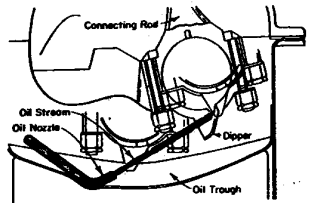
Connecting-rod bearing lubrication (modified)
